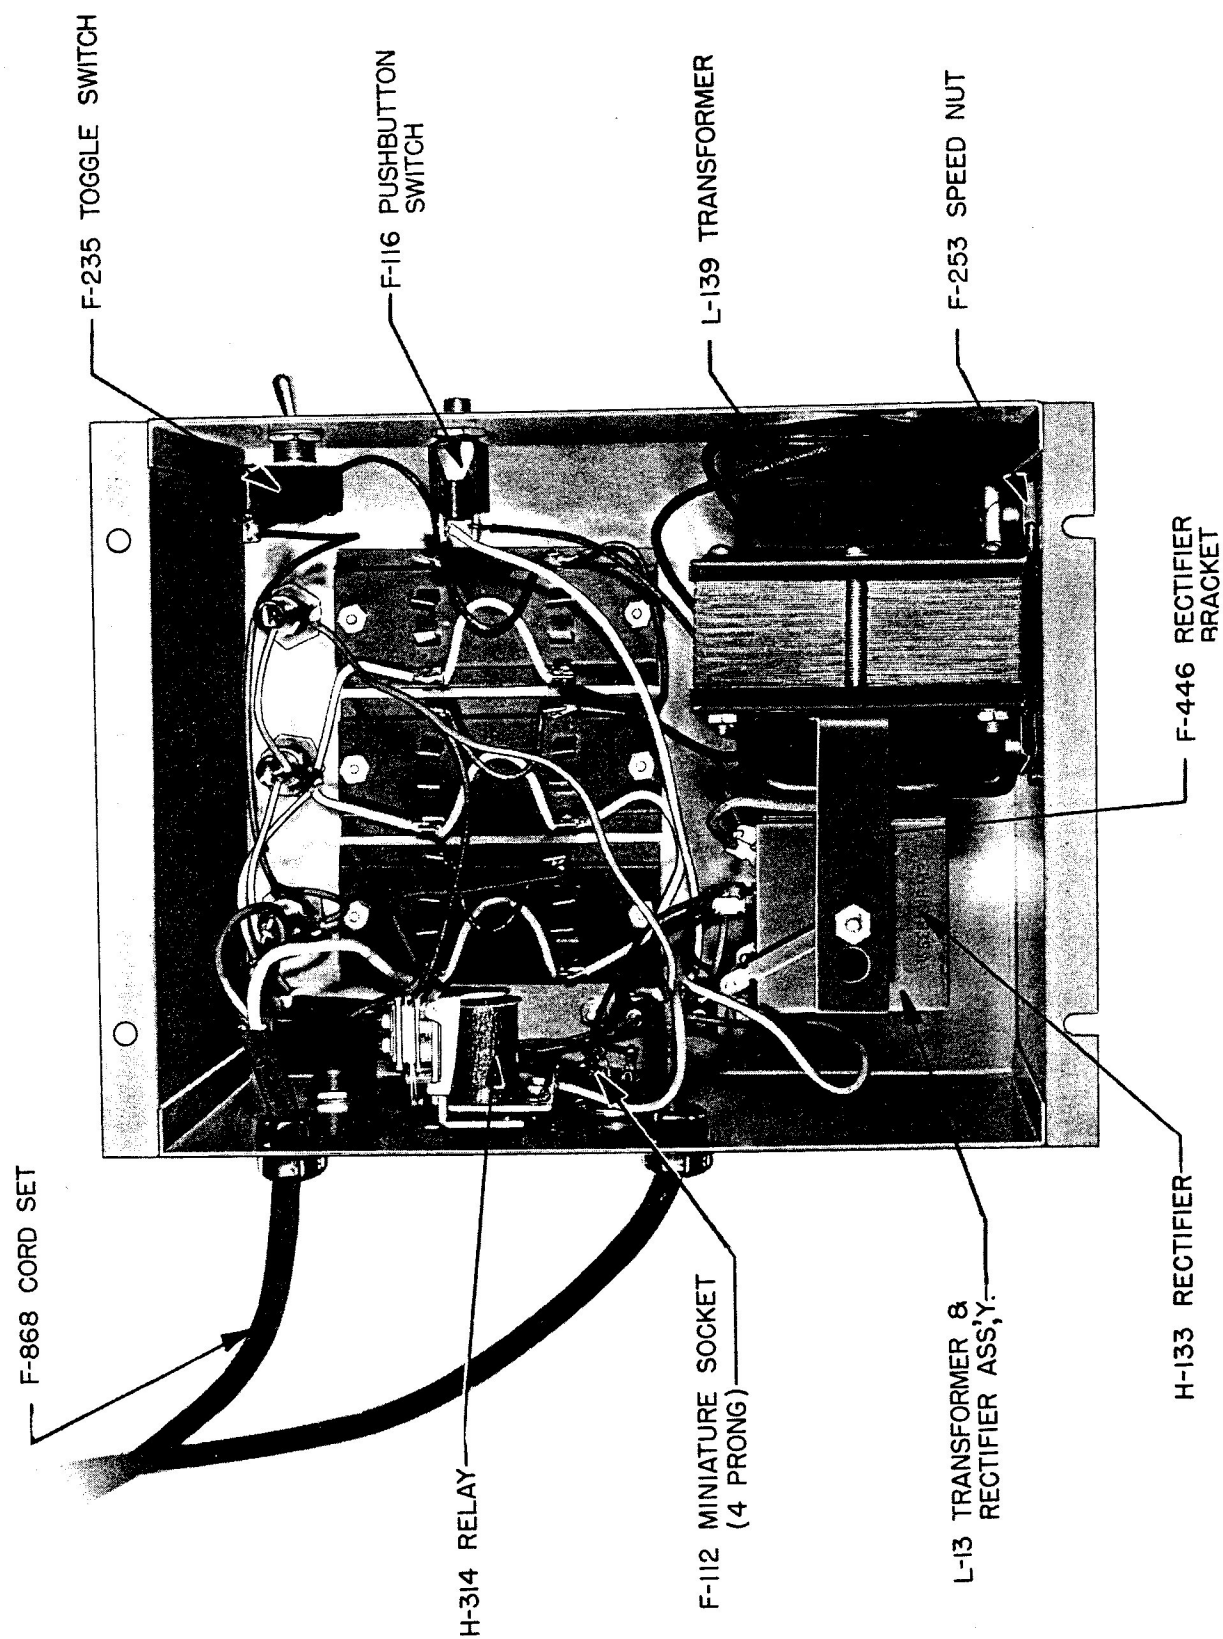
JUNCTION BOX ASSEMBLY - REAR VIEW
